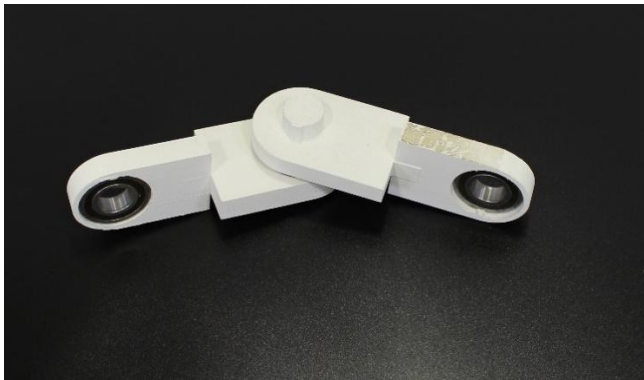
Yaw rotation check of Dual Axis one way bearing systems- mark 3- assembly type 1
